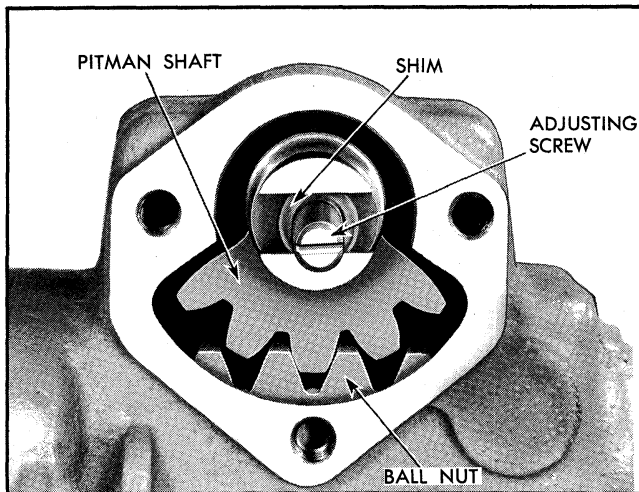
Positioning Pitman Shaft and Ball Nut
